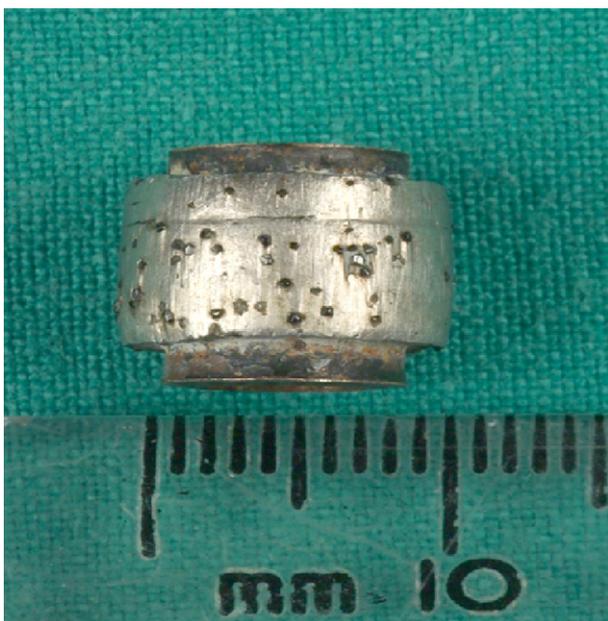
Segment of diamond wire; a steel cable threaded through steel beads to which diamond is bonded.
